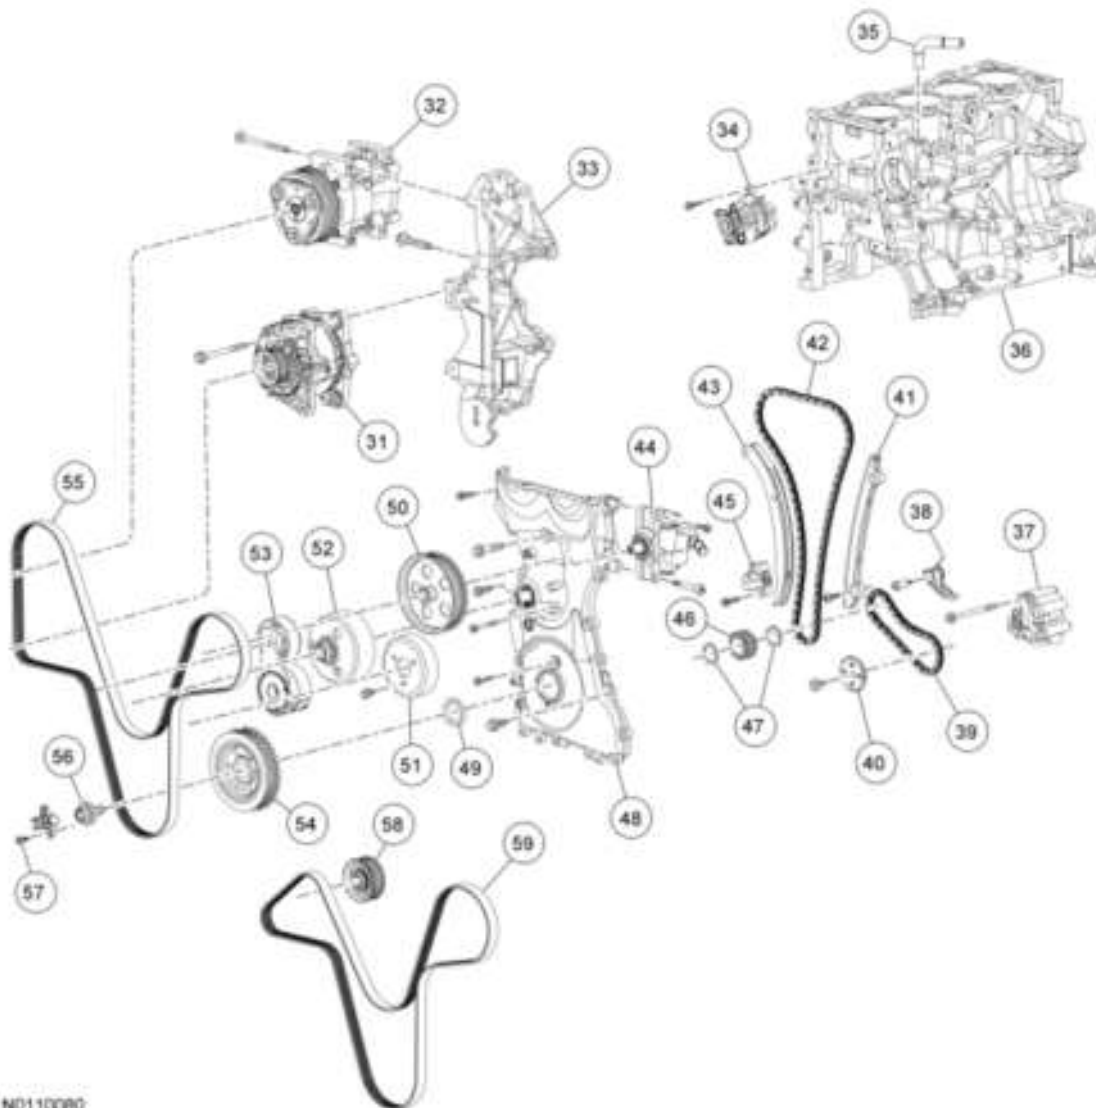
Exploded View Of Lower Engine Block (2 Of 2)
